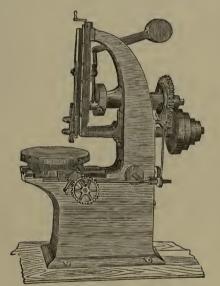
SELLER'S SLOTTING-MACHINE.
